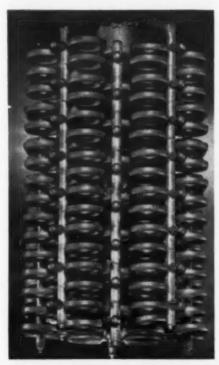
Investment castings for internal combustion engine valve seat inserts before separation from gates and risers.
